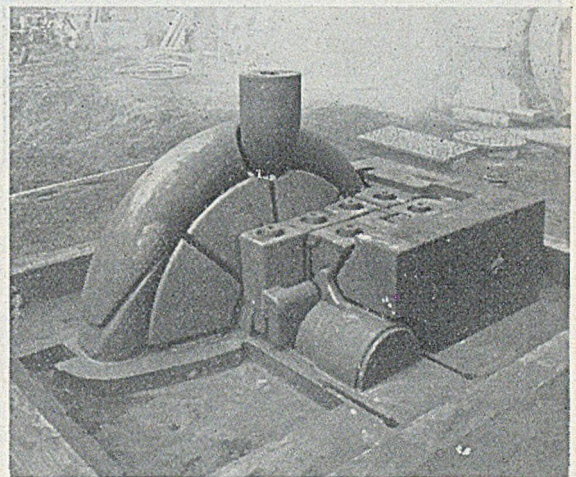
Exhaust-casing Mould partly assembled, showing All Cores set, secured and studded in Position.
